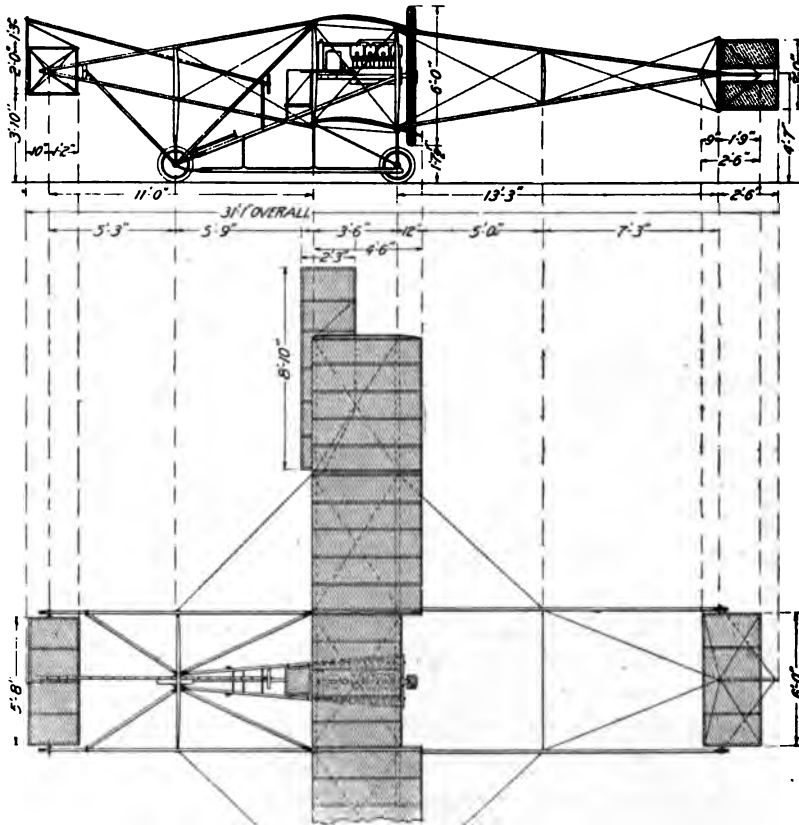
Plan and Side Elevation of Curtiss Biplane
